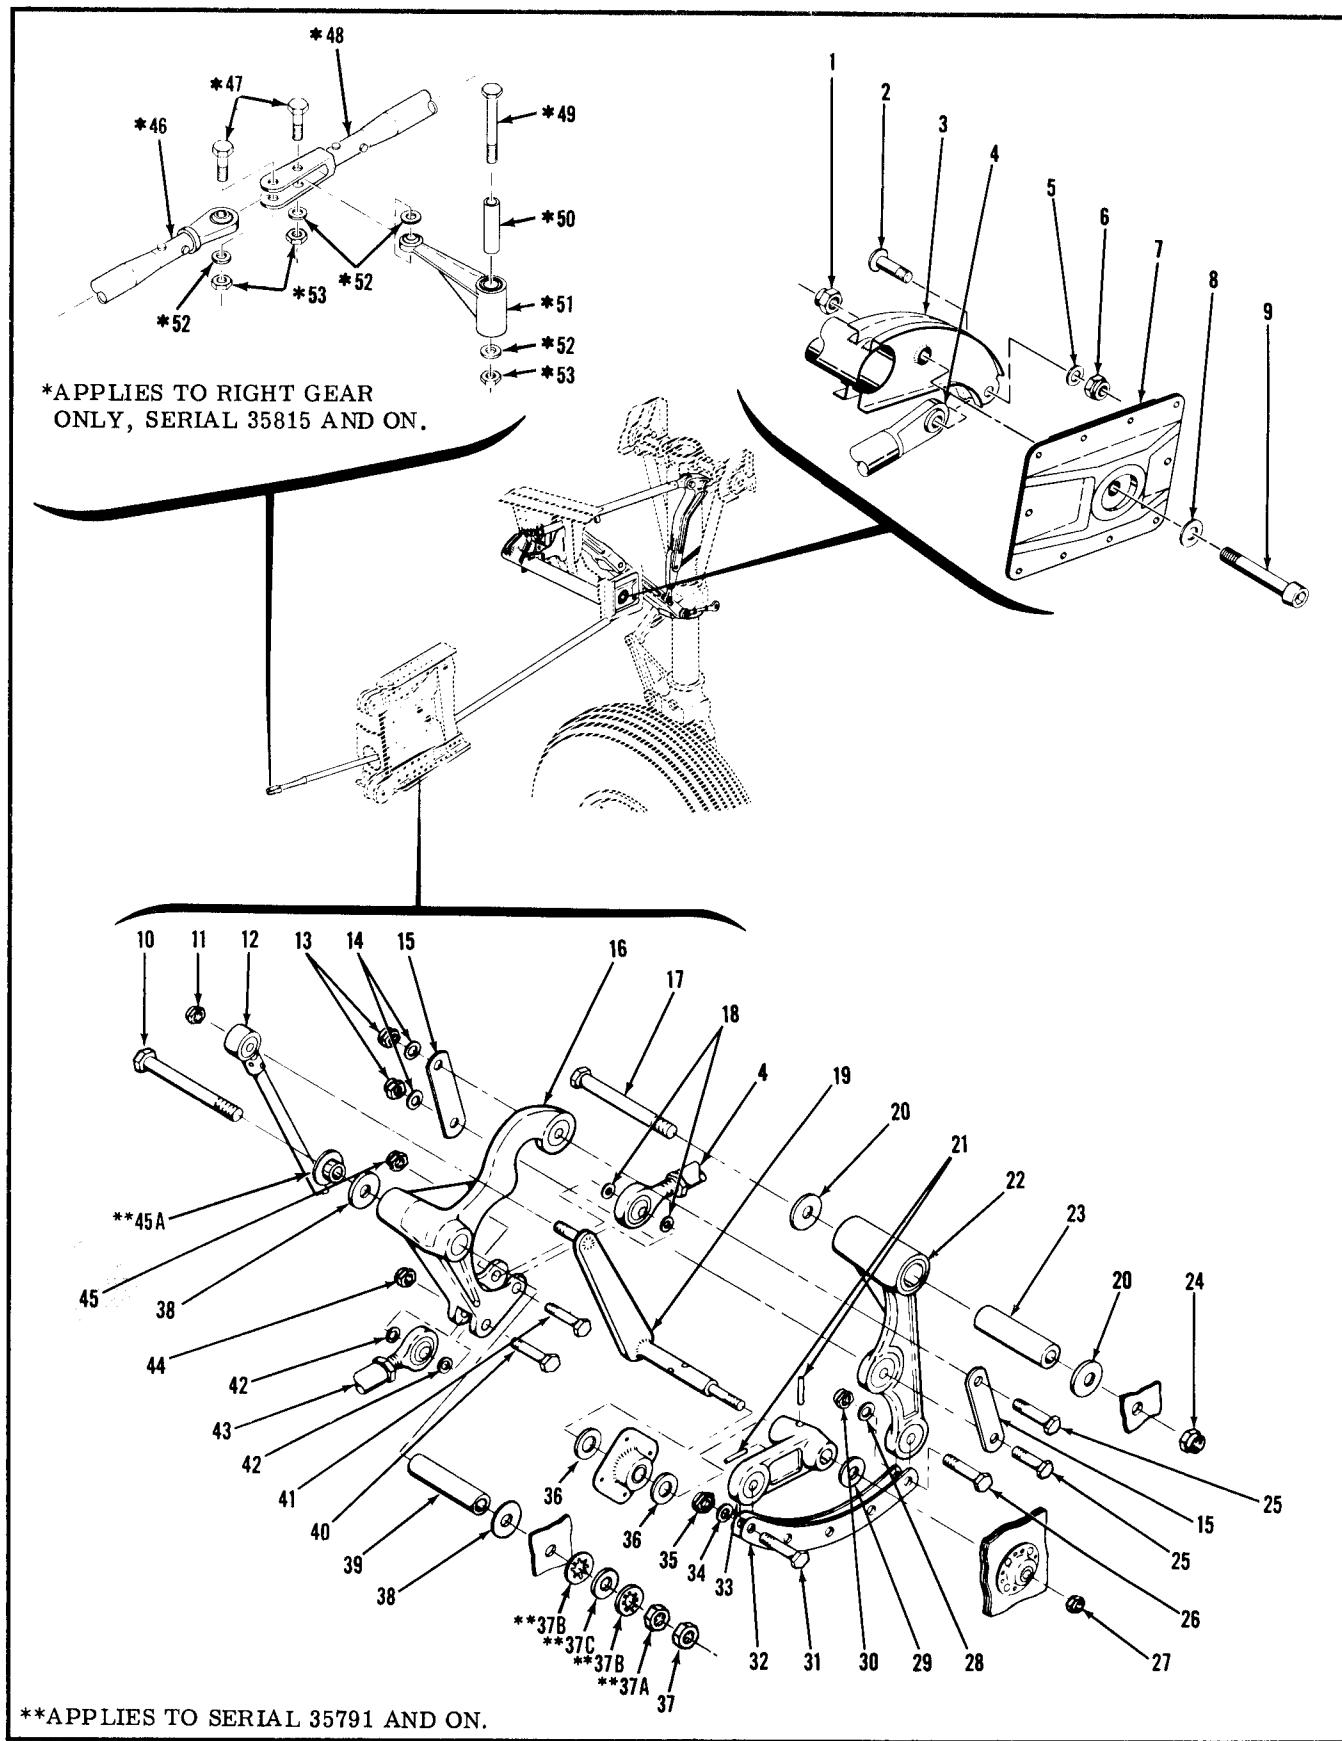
Main Landing Gear Retracting Linkage — Inboard Components
